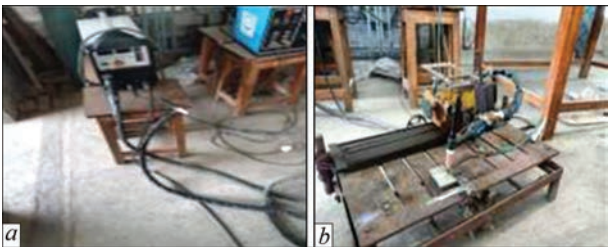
Welding machine (*a*), travelling vehicle (*b*)
